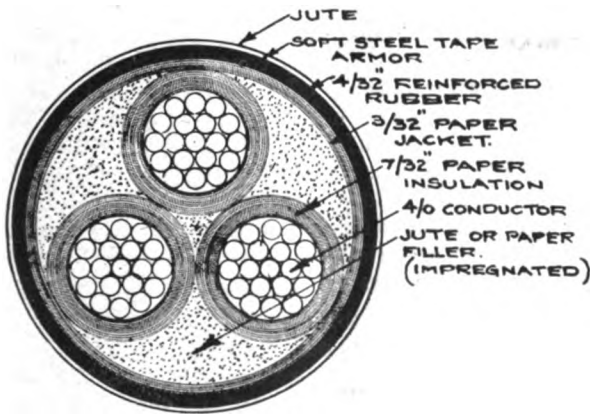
SECTION 4/0-3 COND. 13200V AERIAL CABLE.
